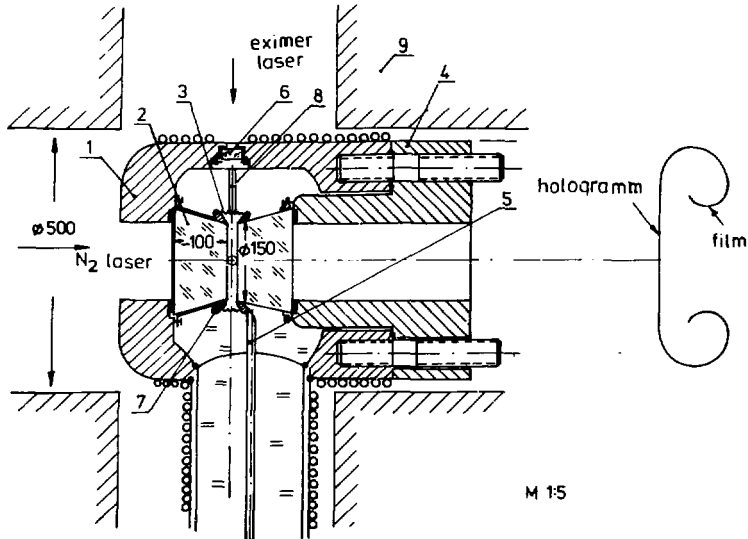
Sectional view of the oil-insulated chamber. 1 - chamber casing with cooling; 2 - illuminators; 3 - vacuum chamber; 4 - pressing flange; 5 - high voltage feeder; 6 - window to let the excimer laser radiation in; 7 - protective electrodes; 8 - inlet channel with H_2 at high pressure; 9 - superconducting magnet coils.
